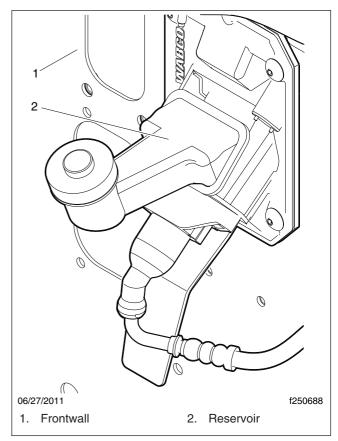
, Master Cylinder, Hydraulic Clutch Control
